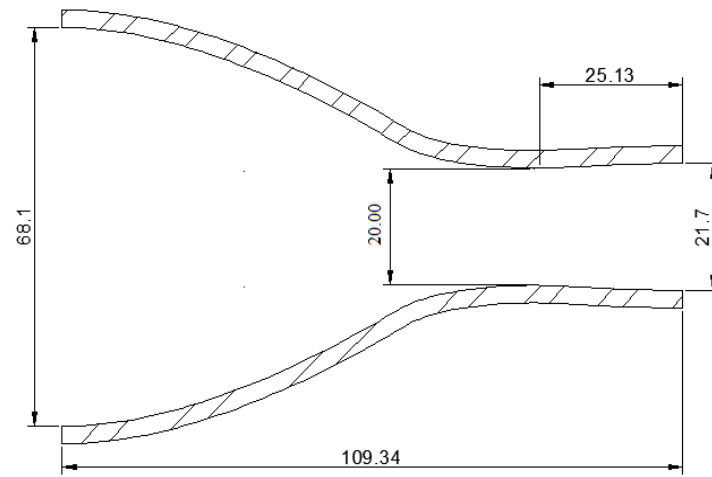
(c) Machine drawing of *PM/3* double parabolic nozzle
